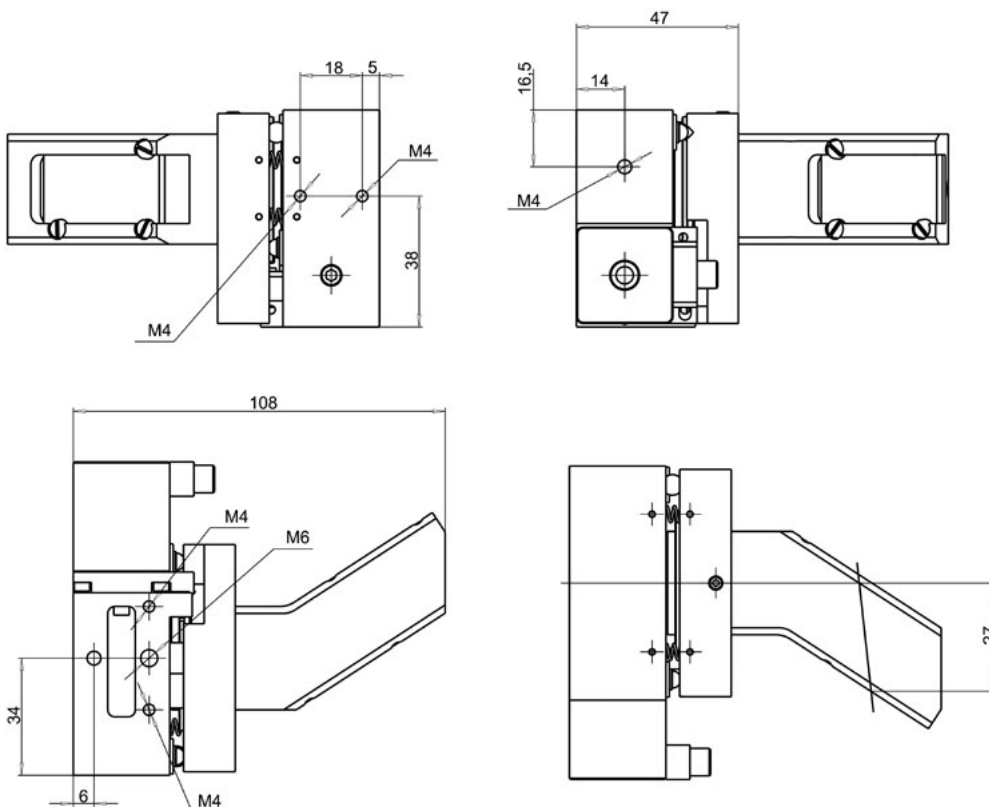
Mechanical drawings of Watt Pilot standard attenuator (continued). All dimensions shown in millimeters.
